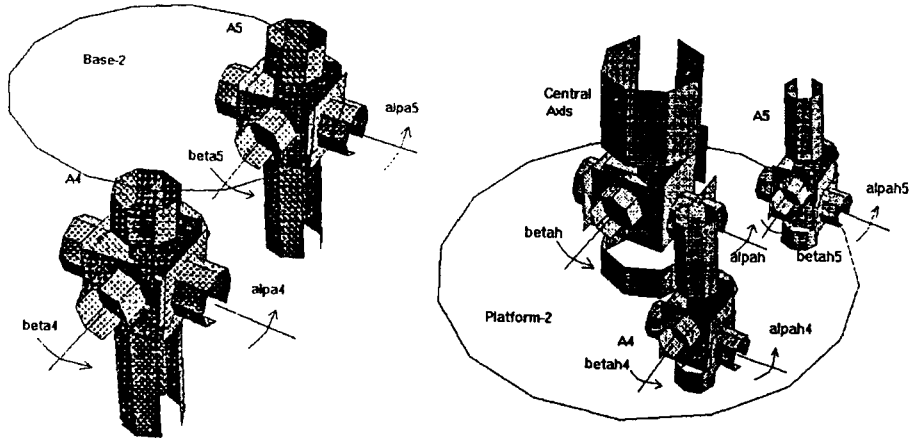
Arrangement of universal joints in base-2 and platform-2
